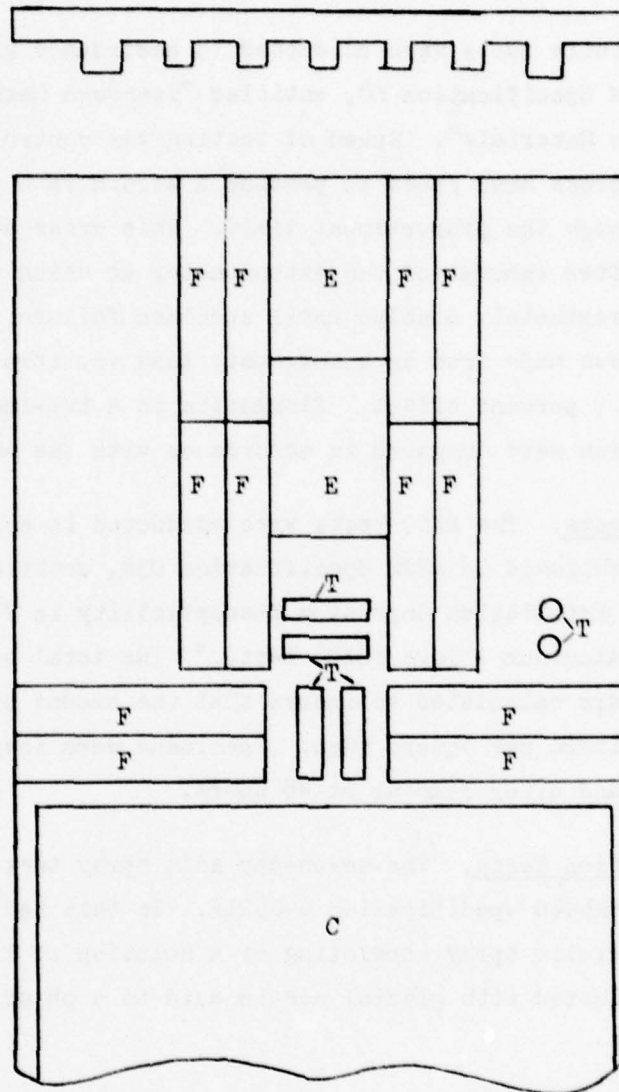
Typical Test Specimen Layout for Wing Spar Cap Material
